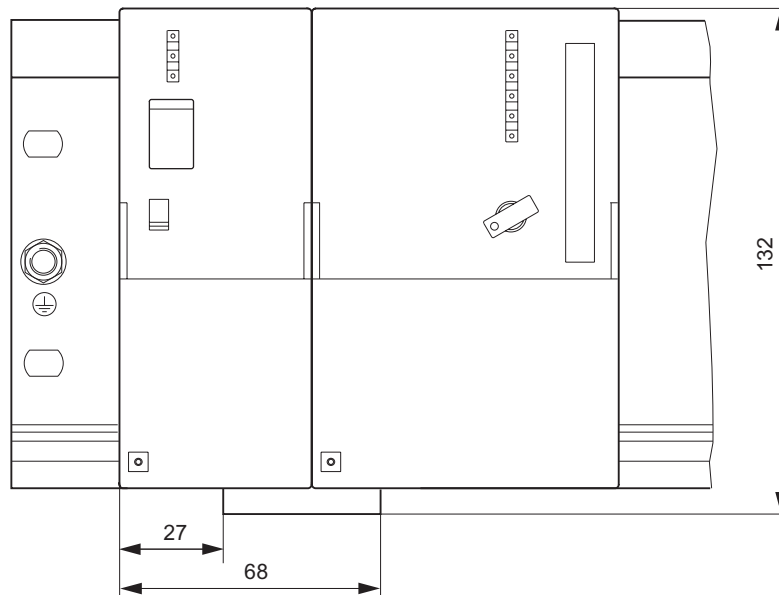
Dimensional drawing of power supply module PS 307; 5 A with CPU 313/314/315/315-2 DP, front view
